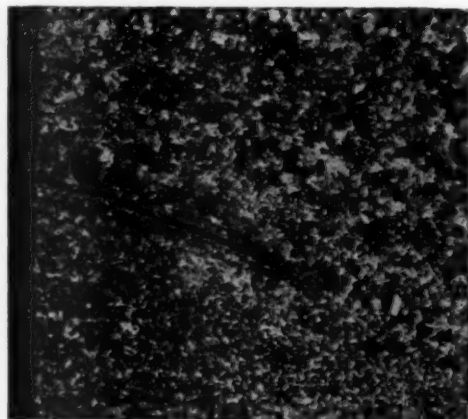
RADIAL CRACK ON THE OD OF A CENTRIFUGAL CASTING; NAVY "M" BRONZE;  $\times 6$
